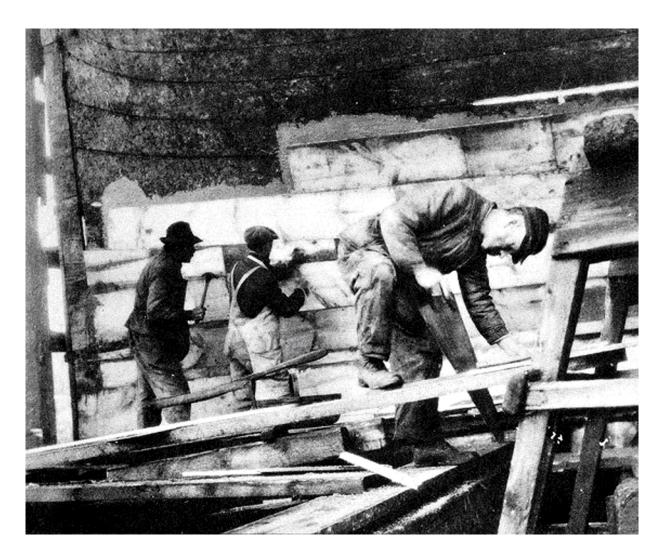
Carpenters applying pine sheathing before the application of metallic sheathing (From Church 1938, Figure 17).
